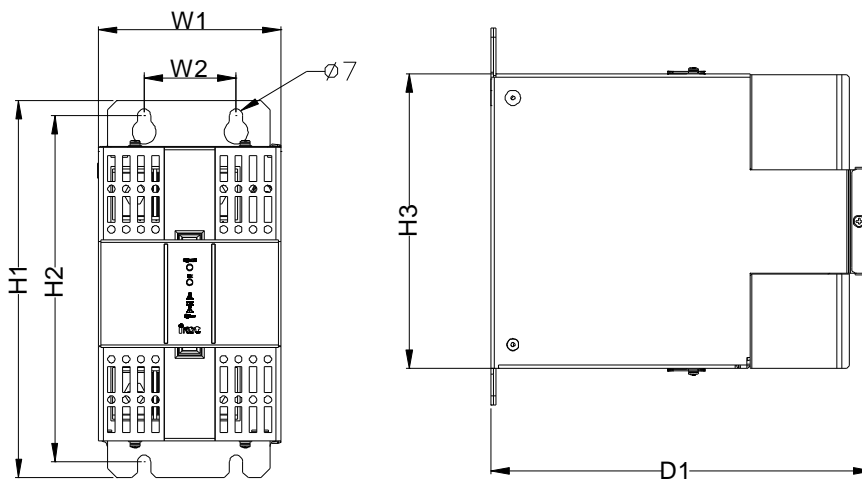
Wall-mounting drawing for BUB600-037-4/ BUB600-075-4
